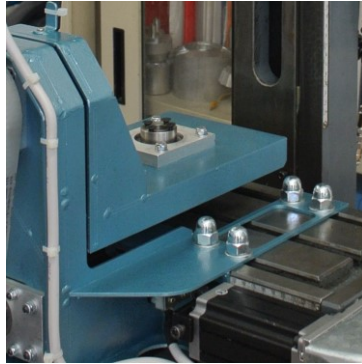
Close view of the bolts holding the frame of the roto-tilting table
